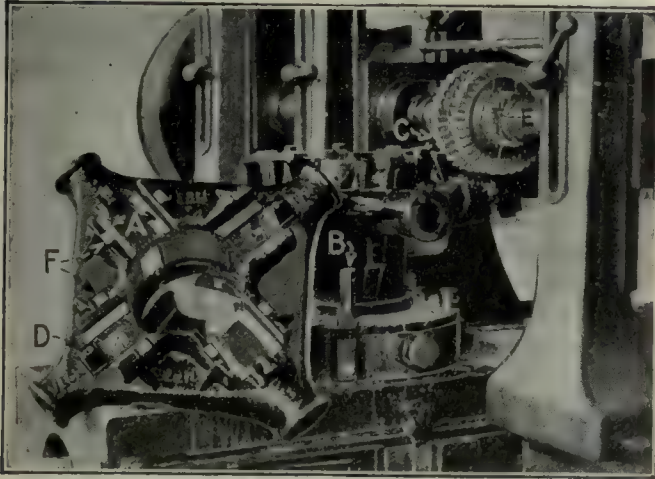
MILLING THE CHANNEL ON LARGE STOCKS
